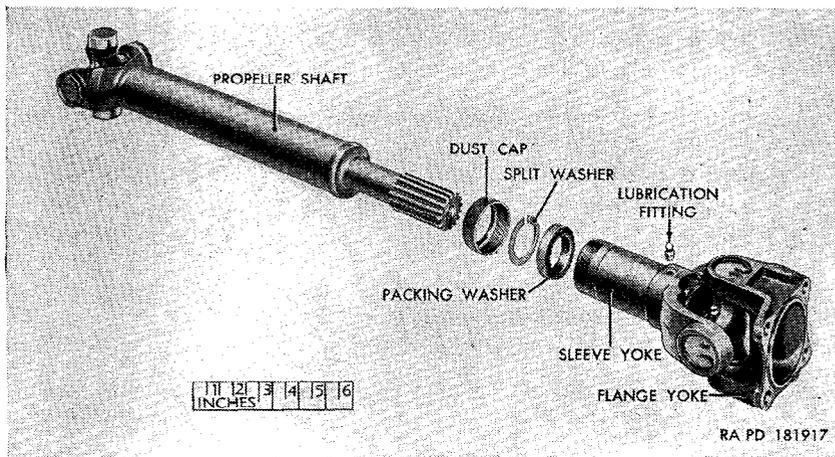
Rear propeller shaft with universal joints—partially exploded view.
